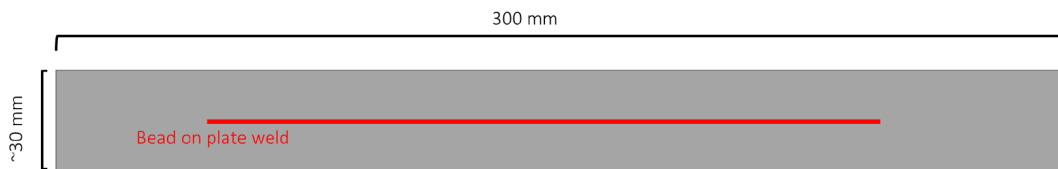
The schematic of bead on plate weld run on the VDM Alloy 780 plates.
